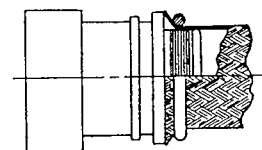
Termination of Cable Overall Shield (Drawing Courtesy of Raychem Corp.)
